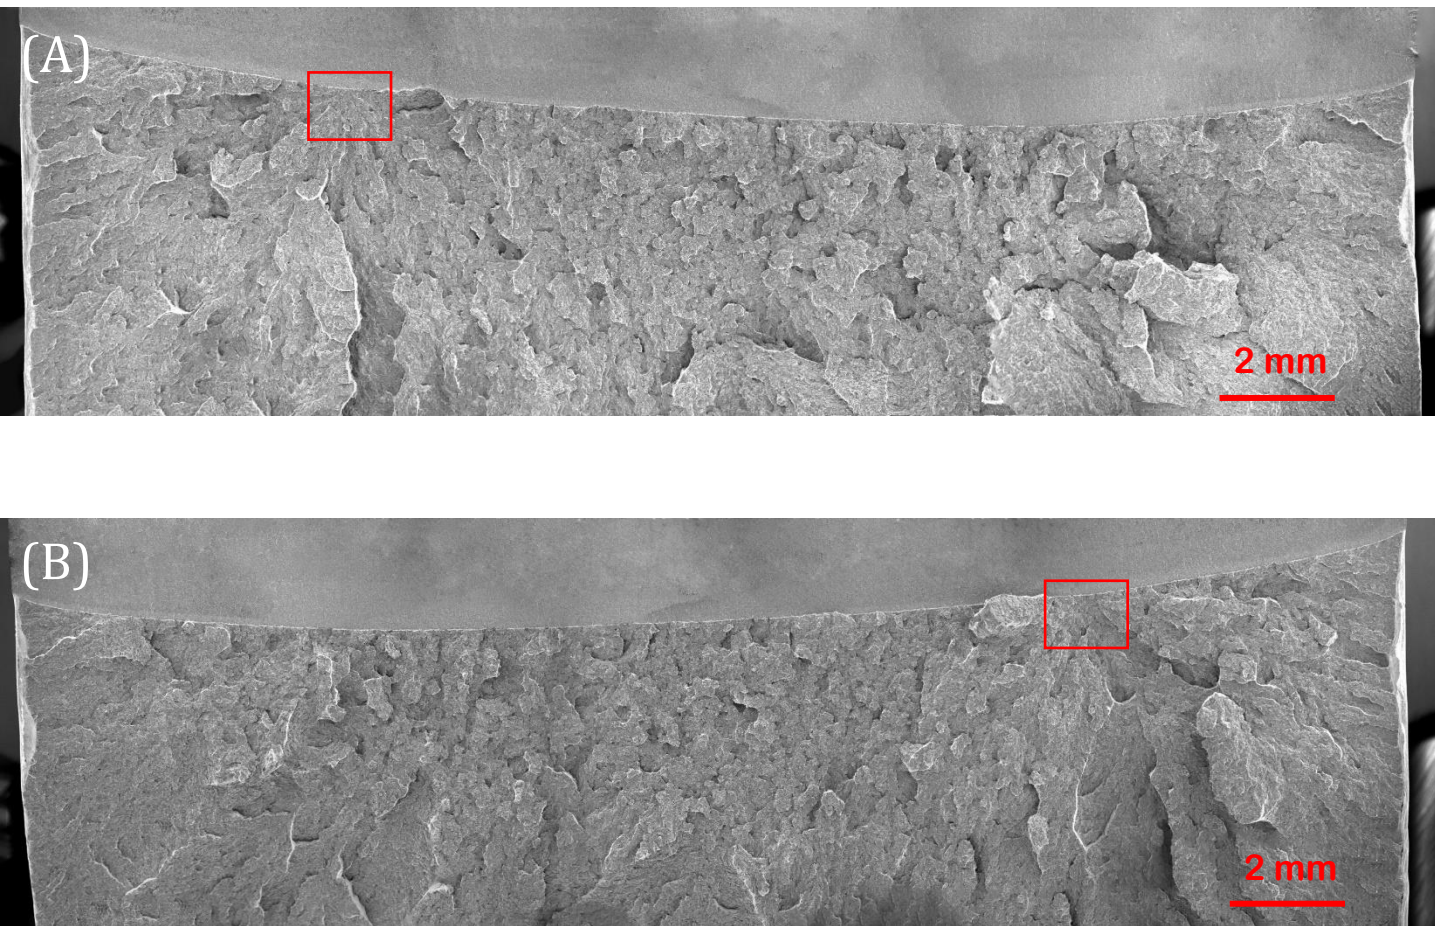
(a). Overview of fracture surfaces on a sharp-cracked specimen, designated CT HT2-o3, tested at -100 °C. Red frames on matching halves (A) and (B) denote the most probable fracture initiation areas. Test results: Critical J-integral ( $J_c$ ) value of  $40.3 \text{ kJ/m}^2$ , crack tip opening displacement (CTOD) of 0.031 mm, local cleavage fracture stress of 2322 MPa ( $n=0.1$ ), fracture initiation distance ( $X_o$ ) of 53  $\mu\text{m}$ , and an average stable crack extension of 9  $\mu\text{m}$ .
